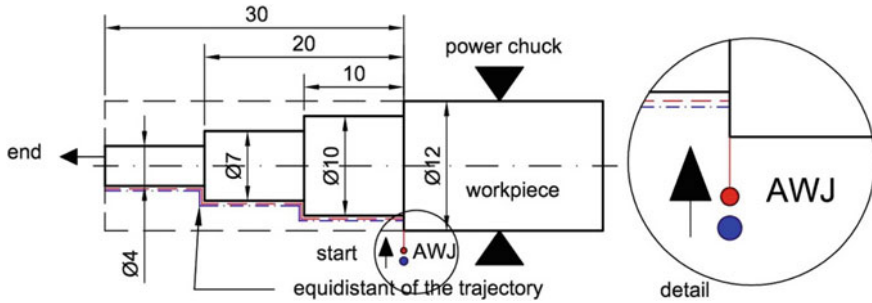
2D design of workpiece shape with trajectories of cutting head movement
